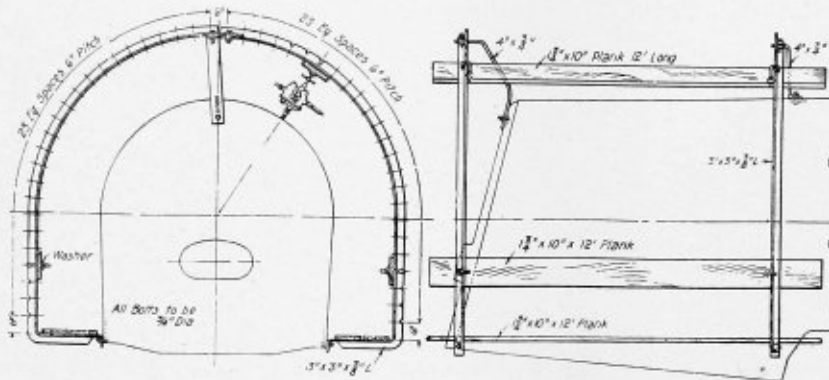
SCAFFOLD USED FOR DRILLING STAY-BOLTS, WHEELING & LAKE ERIE RAILROAD, BREWSTER, OHIO.
